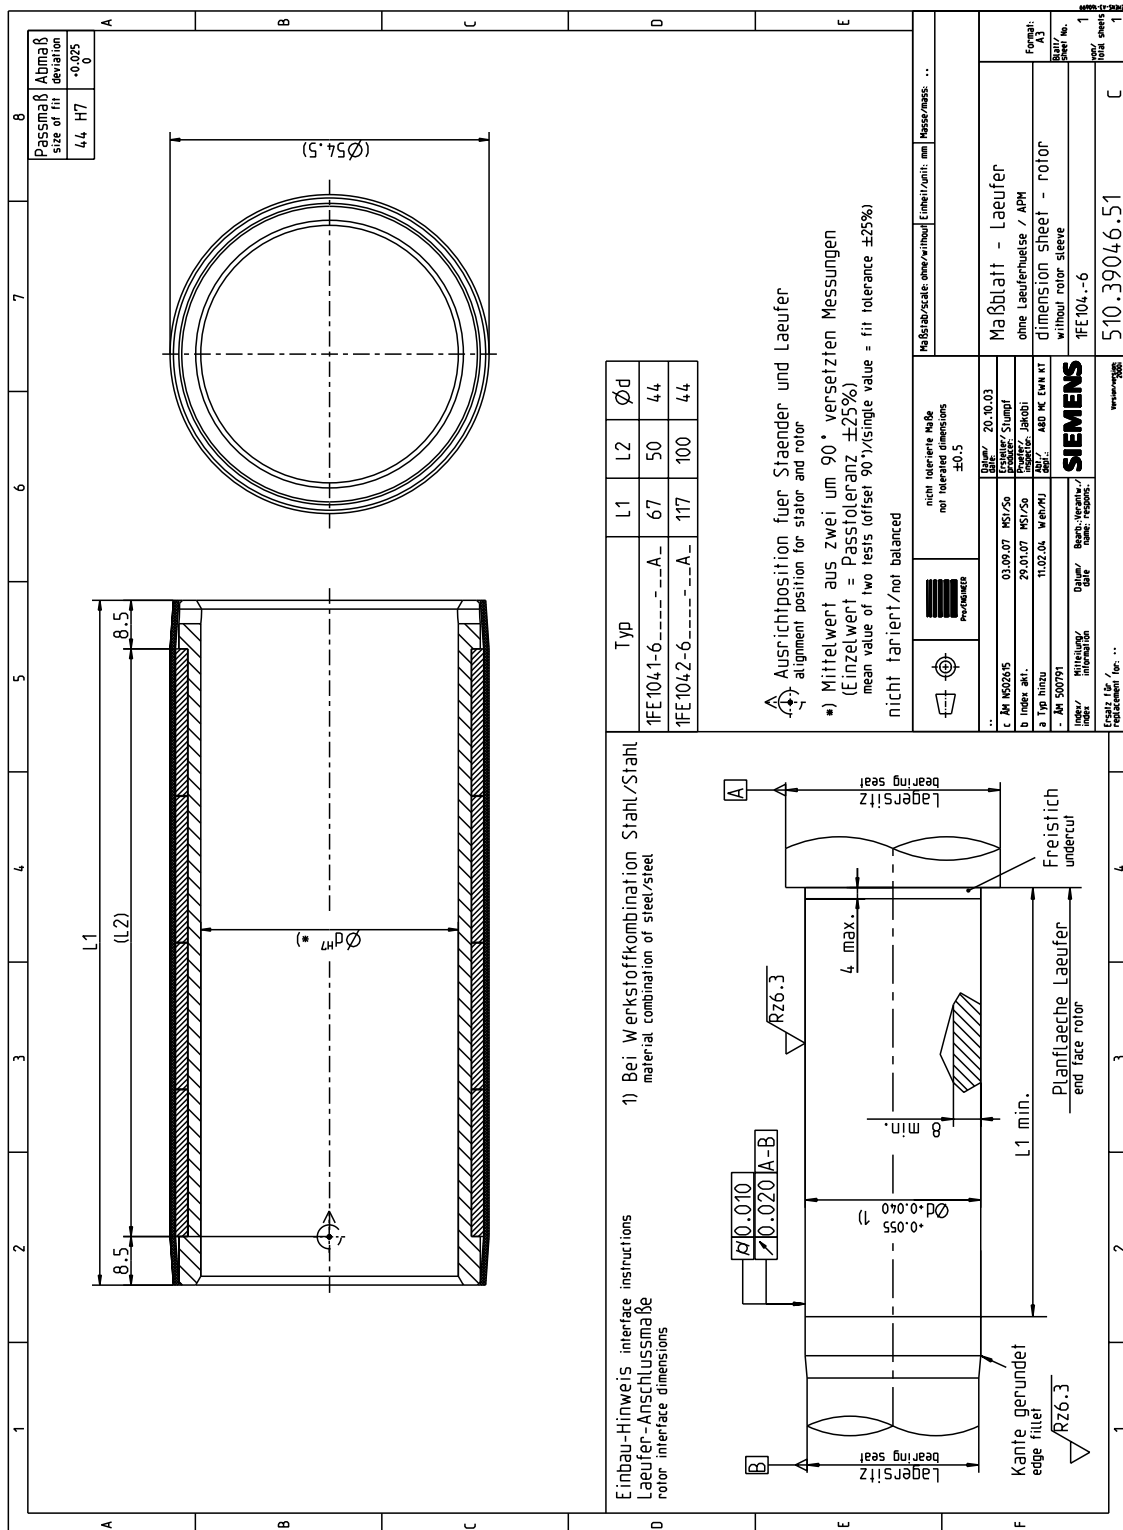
1FE104□-6, built-in motor without rotor sleeve
